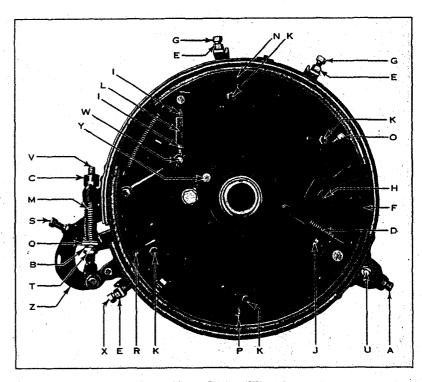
Rear Wheel Brakes (Wheel Removed)
